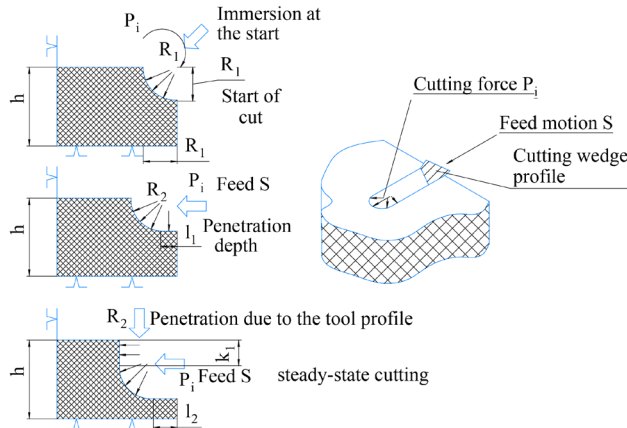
Model of the action of the cutting wedge on a machined workpiece
